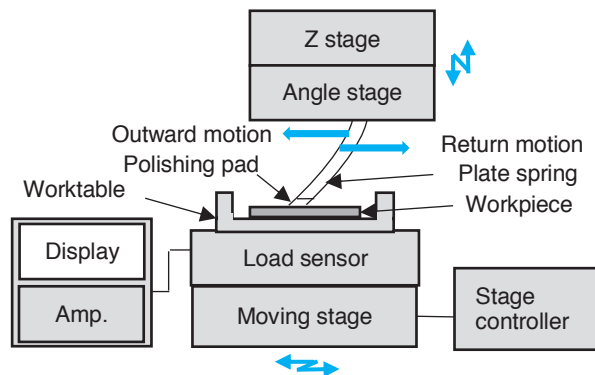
Schematic drawing of polishing machine using a plate spring.
